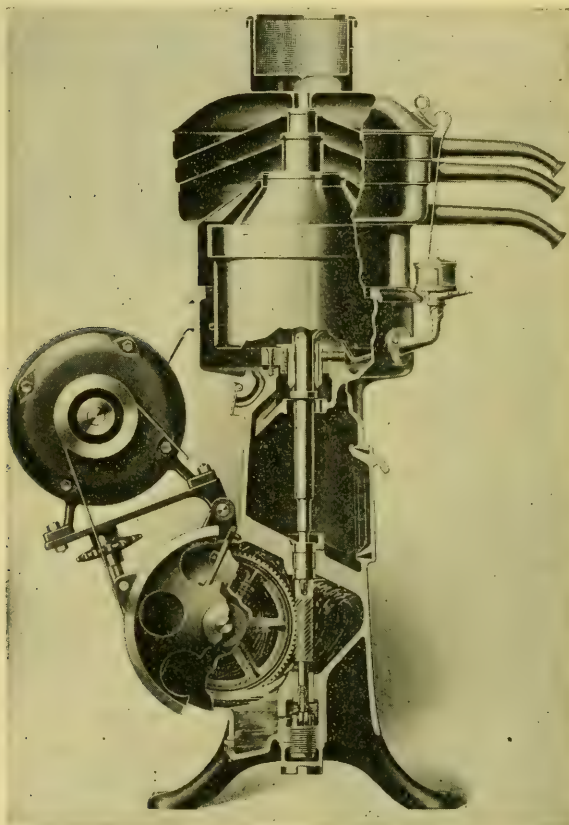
Cross-section of Motor-driven De Laval Centrifugal Oil Purifier.
